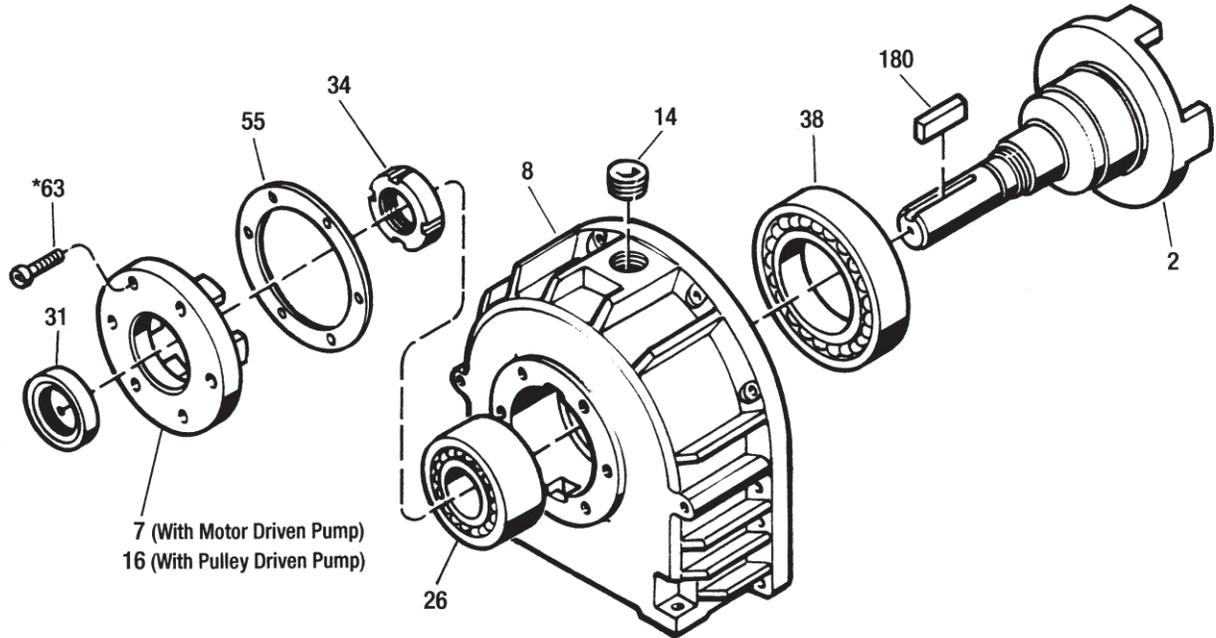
Output C-Face Adapter (8-1/2" AK)
